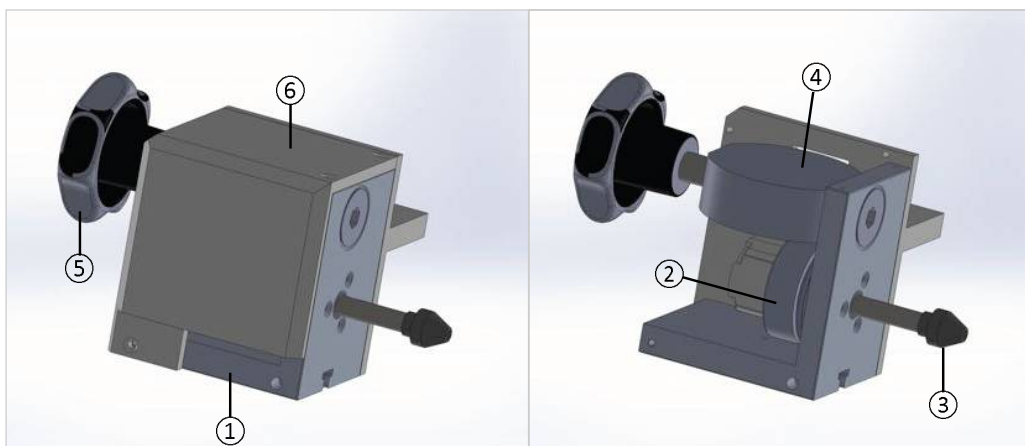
Rotative Driller: 1) Base; 2) DC Brushless Motor; 3) Chuck; 4) Load Cell; 5) Knob; 6) 3D printed case.
